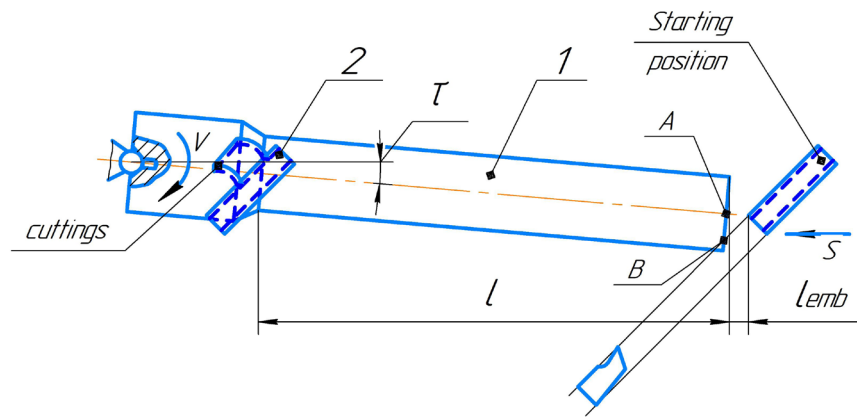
Processing scheme of a long shaft with a through-hole reciprocating cutter
